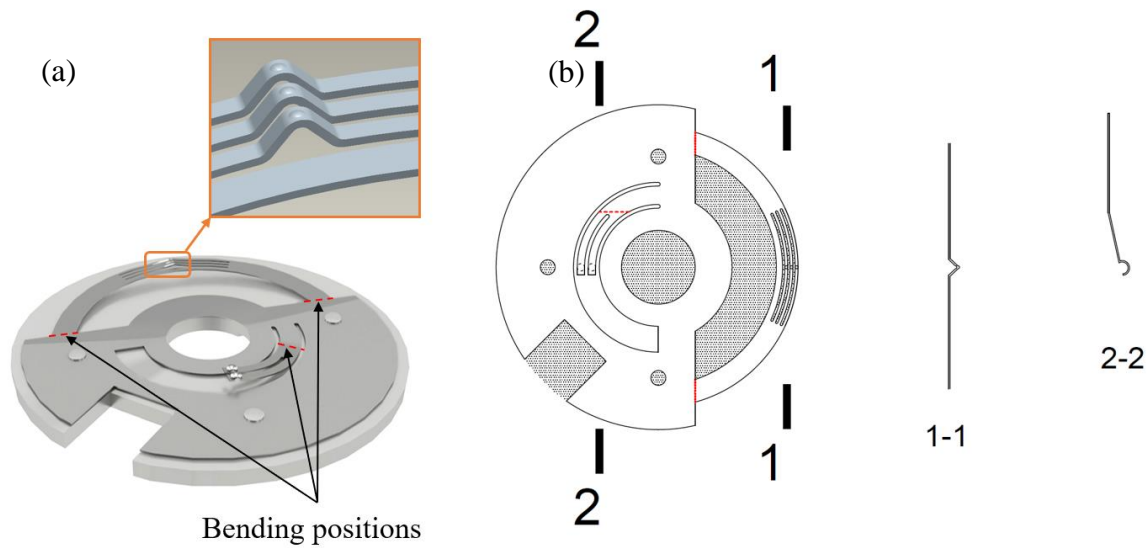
(a) 3D and (b) 2D design files of contacting pins. Three bending positions have been marked out using red dashed lines. The height of pins after bending influences the contacting force when the pin is assembled with the pad. The zoom-in view and cross-section views show the detailed design of the contacting points. There is a small bump at each contact points to decrease the contact area.
